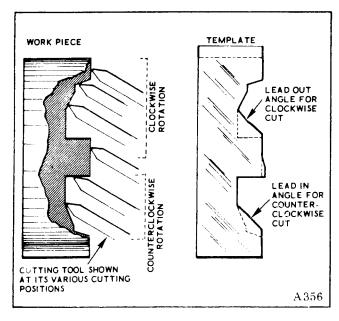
Example of Facing Both Sides of Center by Reversing Spindle Rotation
